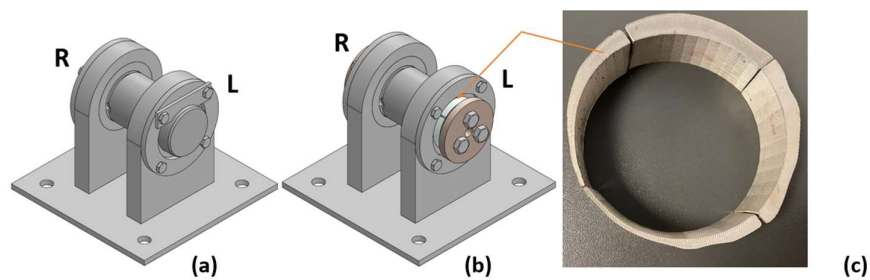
Test equipment, with (a) the cylindrical pin, (b) expanding pin, and (c) 3D printed boss at left (L) support of the expanding pin
